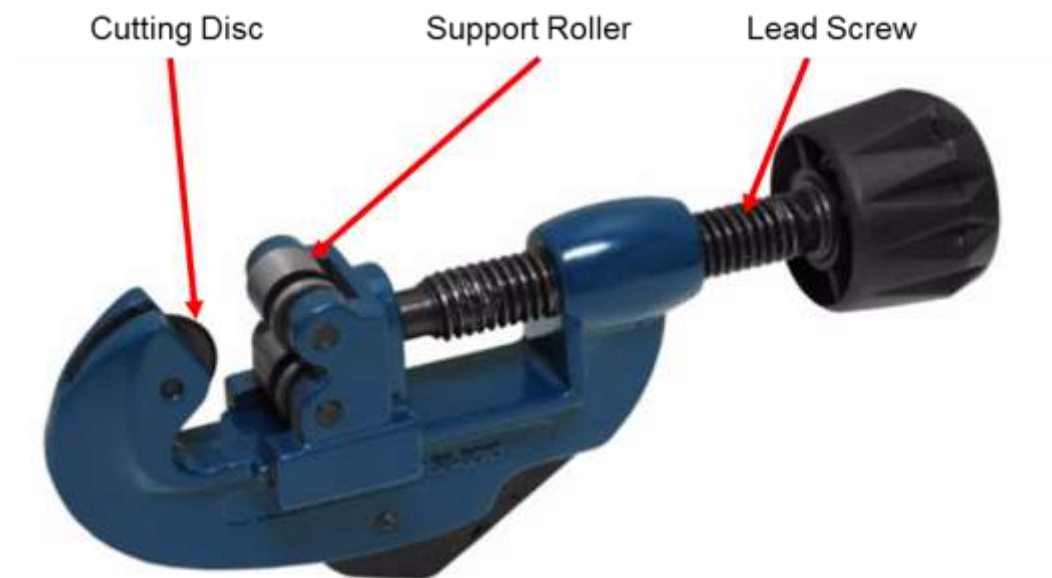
Pipe cutting tool (Canadian Tire Mastercraft 1/8 to 1-1/8-in. Tube Cutter. (n.d.)
